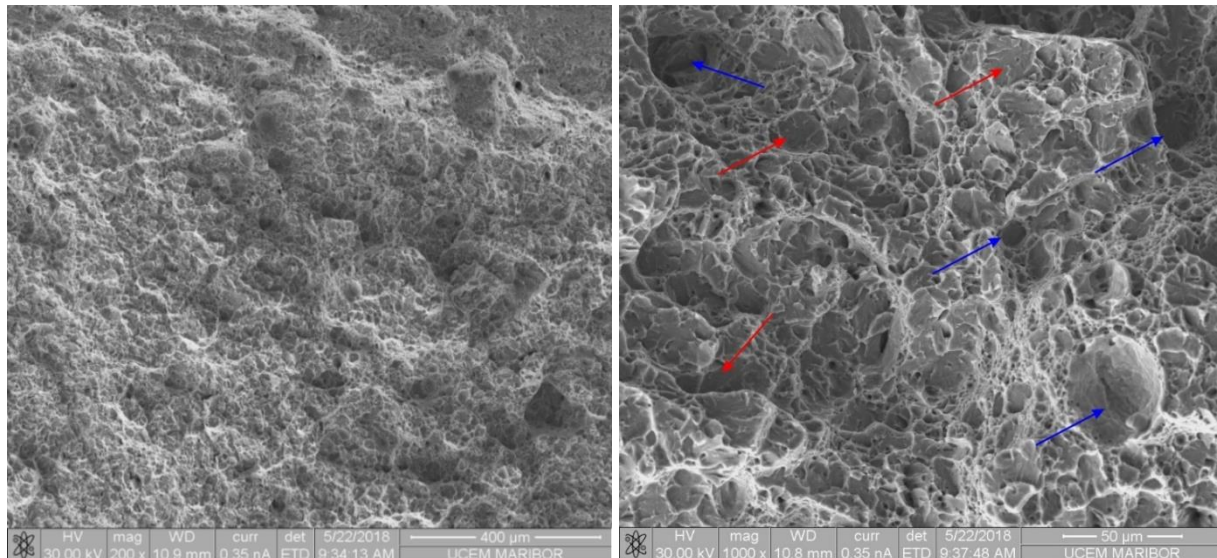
12 Fracture surface of the AF+WQ specimens at 100x (left) and 500x (right)
